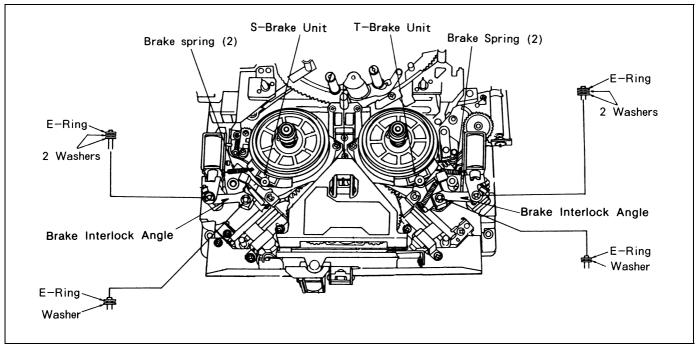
Removal of the S-Brake Solenoid and the T-Brake Solenoid
